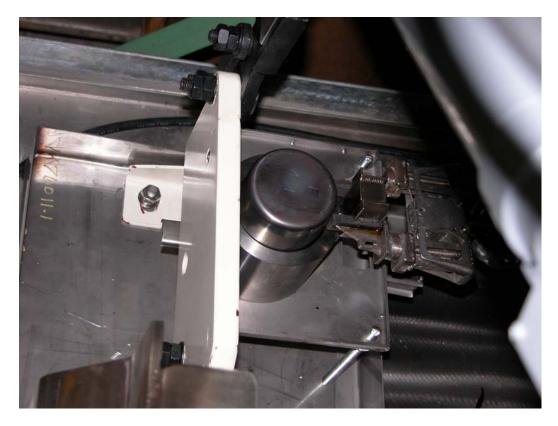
Tab Shear assembly with manipulator positioning the SRNL beaker
